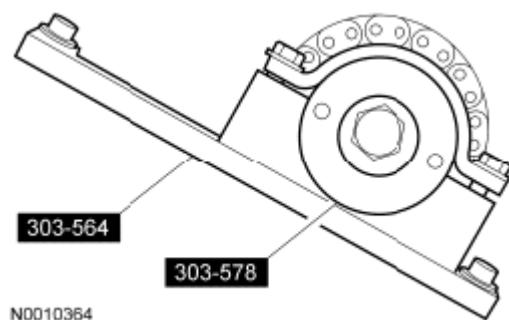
Identifying Camshaft Sprocket Holding Tool And Adapter
